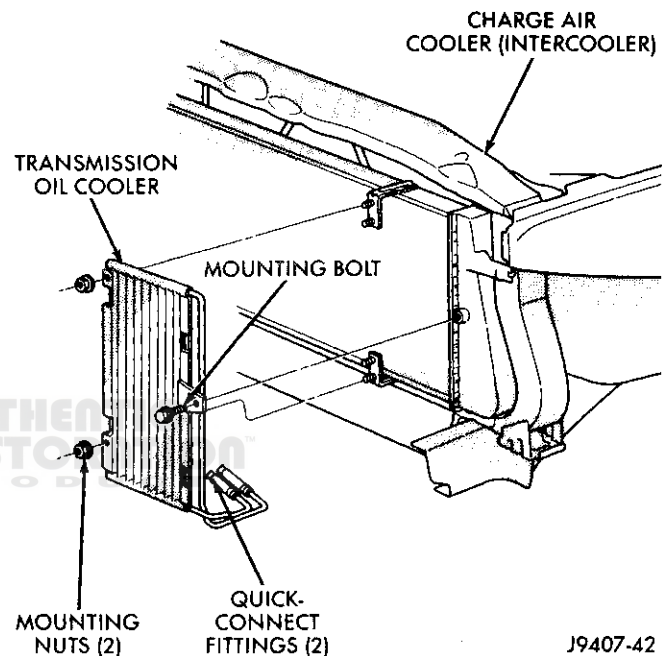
Air-to-Oil Cooler—Diesel Engine
